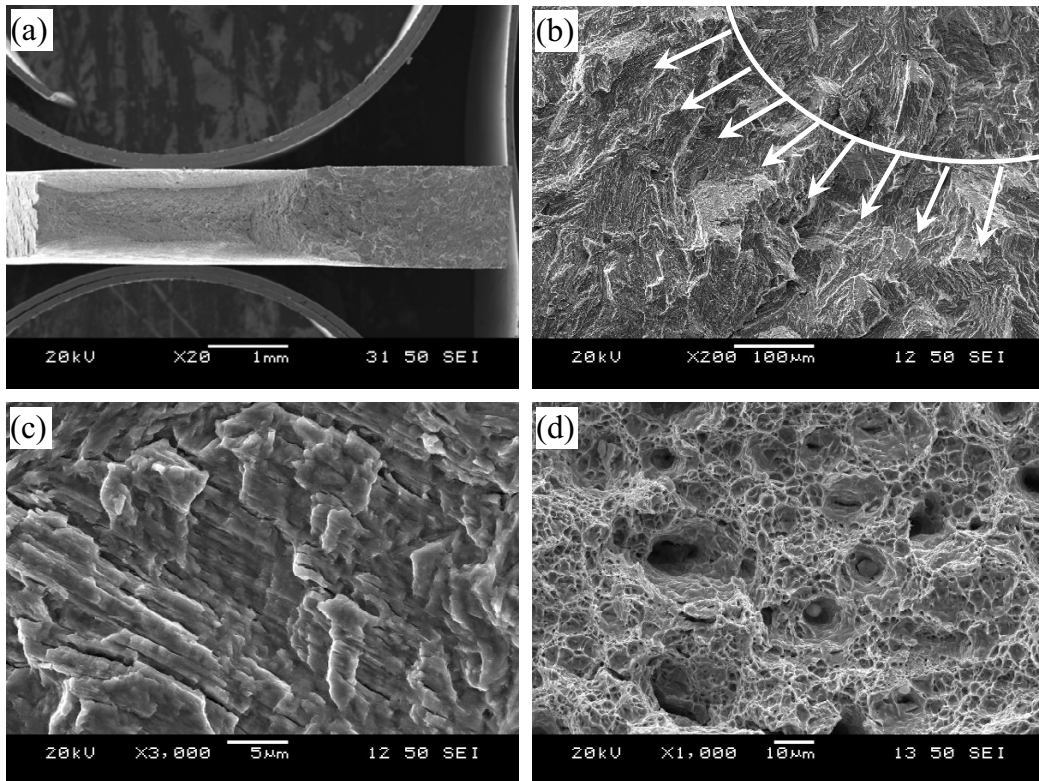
Fatigue fracture surface of a DP980 welded joint tested at a stress amplitude of 225 MPa, (a) Overall view of the fracture surface at a low magnification, (b) crack initiation site, (c) crack propagation area, and (d) fast fracture area.
